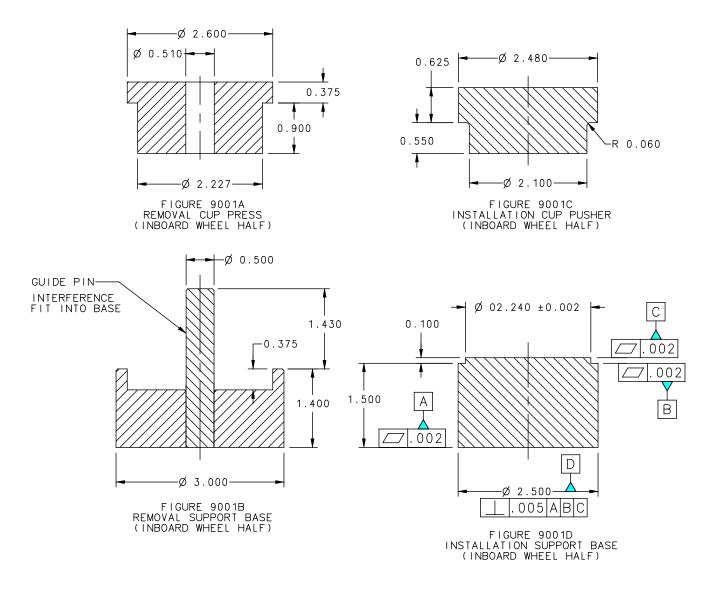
Inboard Wheel Half Bearing Cup Tools
